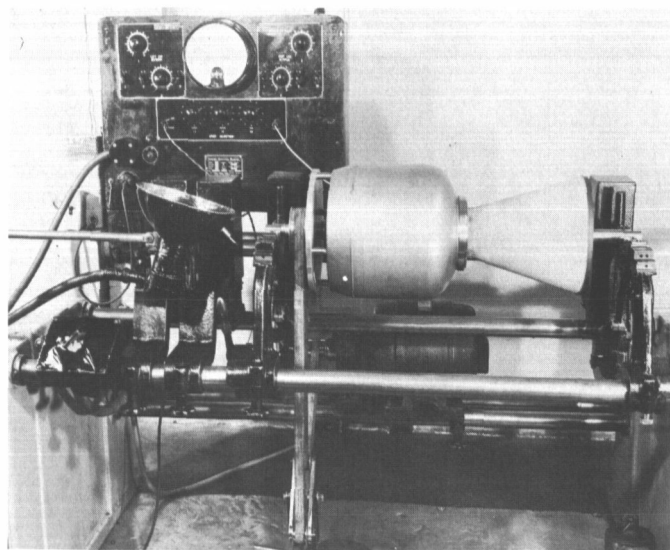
Empty motor case and nozzle on Gisholt balance machine
